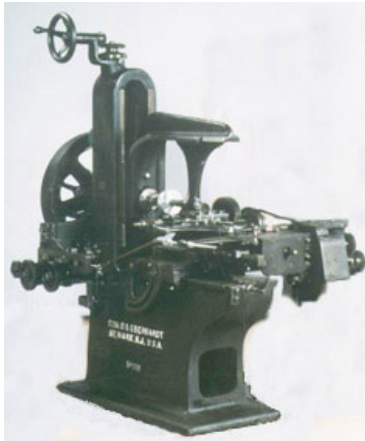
Reproduction of an automatically indexing gear cutting machine.
